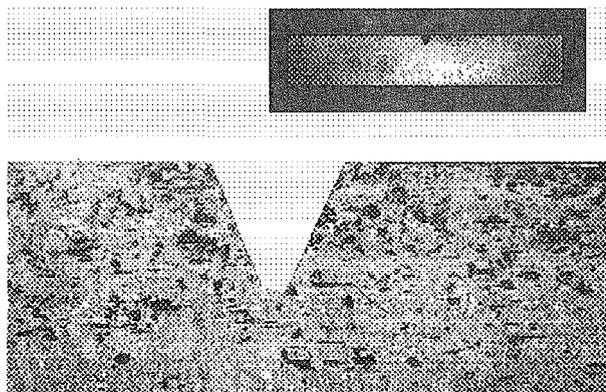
Charpy (type-A) impact test specimen machined by CNC milling machine
